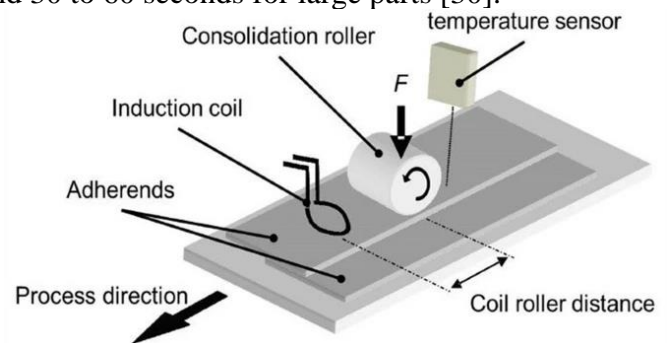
Process design and crucial components of the continuous induction welding process for thermoplastic composites [31]
